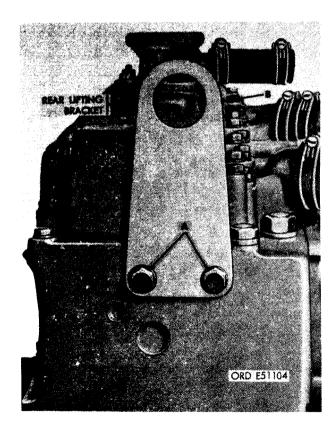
REMOVING OR INSTALLING ENGINE REAR LIFTING BRACKET.
